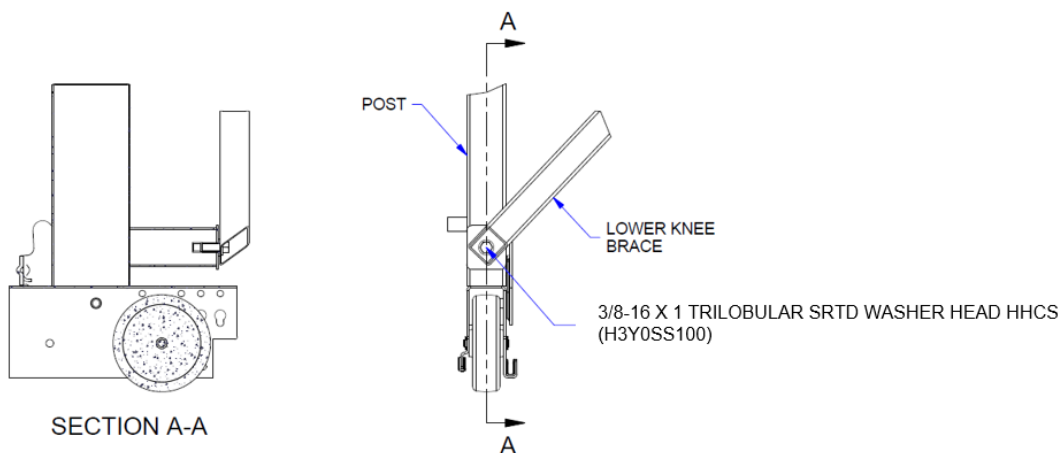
Knee Brace and Horizontal Strap to Post Connection
